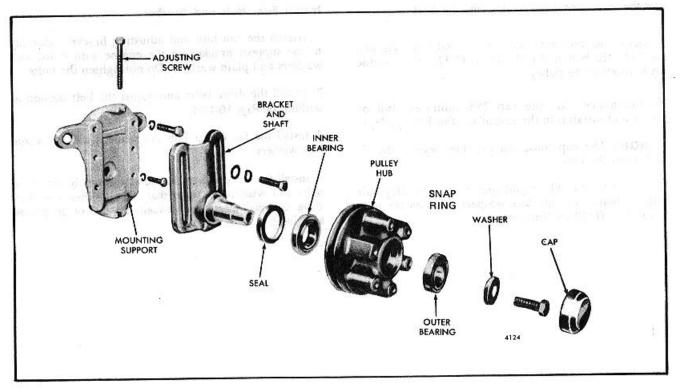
Shaft Type Fan Hub Assembly Details for Compact Front End Engine.
